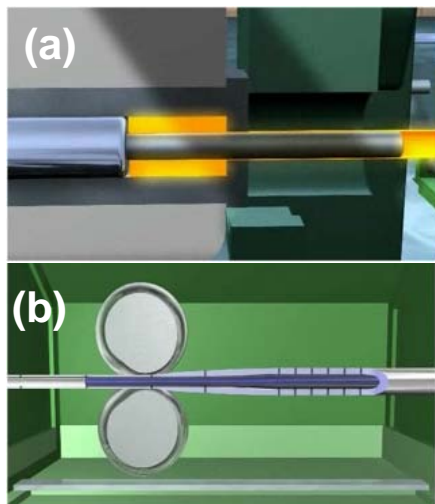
(a) Extrusion of a seamless tube and (b) pilgering cold work [4].
